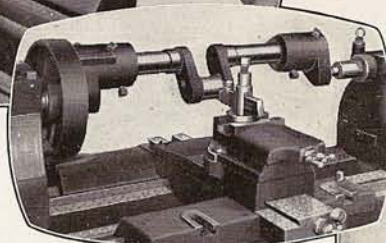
Offset Centers are Sometimes Used for Machining Crankshaft Throw Bearings.
